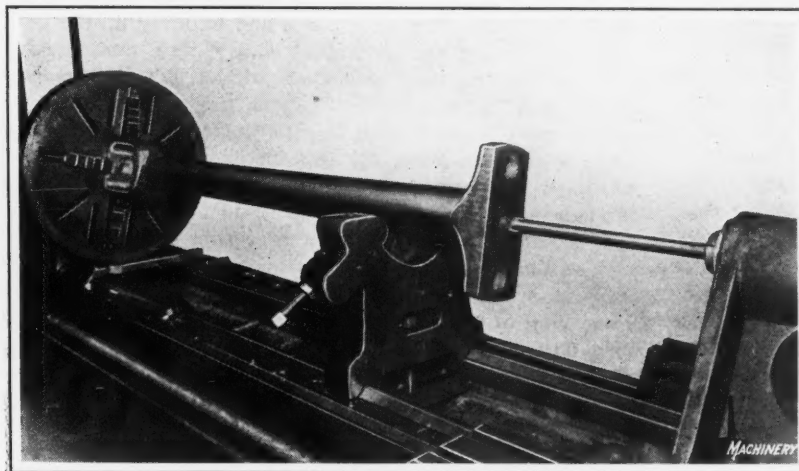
Boring Axial Oil-hole through Connecting-rod
